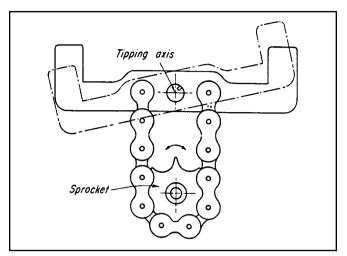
An extension of the rack-andpinion principle—This is a soldering fixture for noncircular shells. Positive-action cams can be similarly designed. Standard angle brackets attach the chain to a cam or fixture plate.
